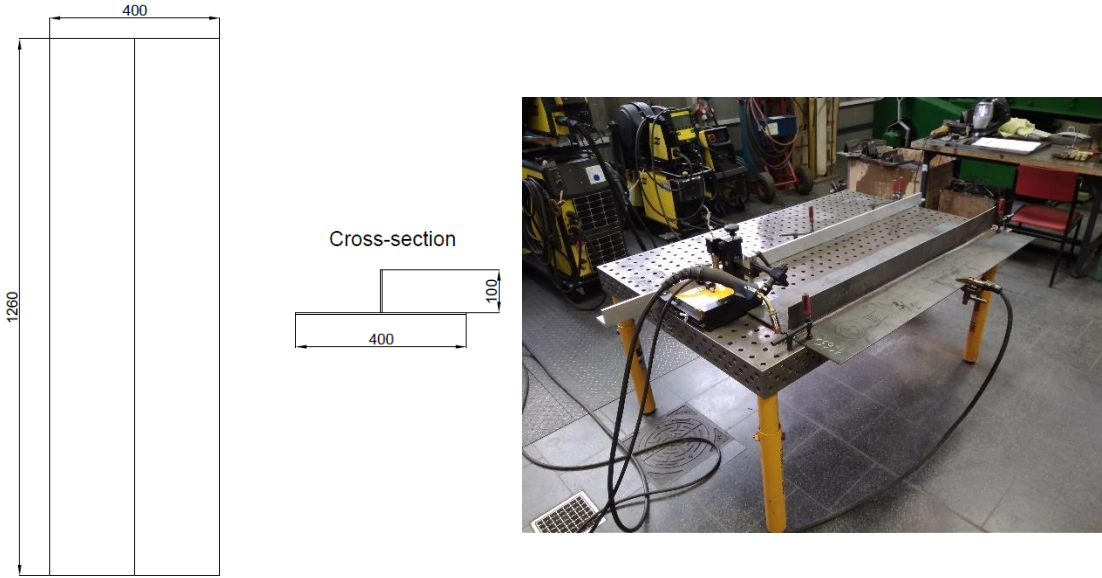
Specimens dimensions (left) and specimens during the welding process (right).
